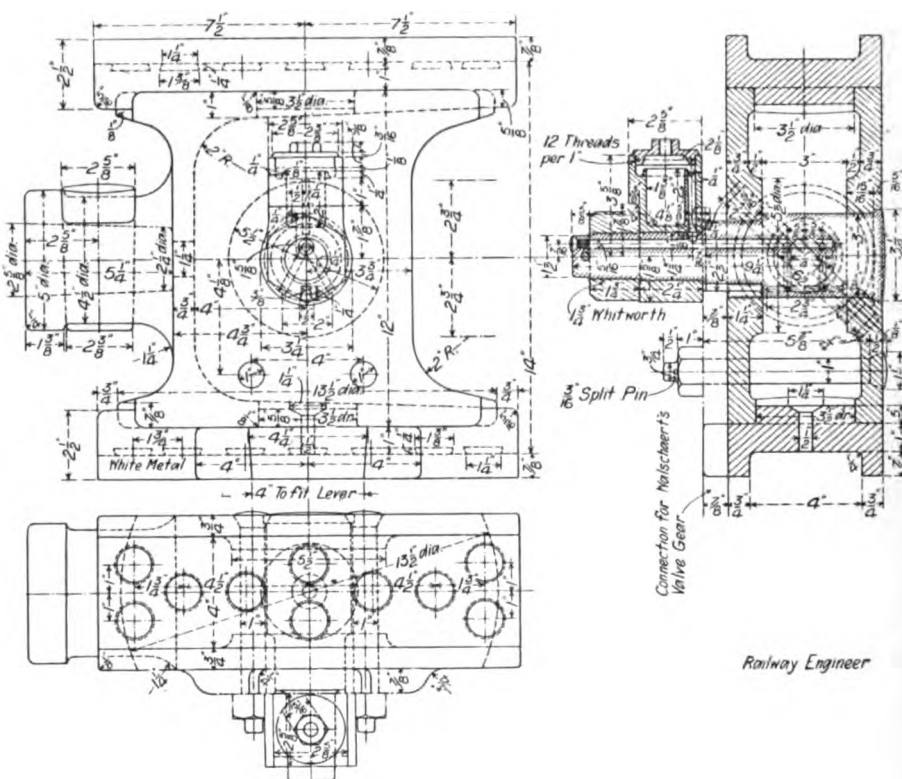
Crosshead and Gudgeon Pin; London and South-Western Railway.
